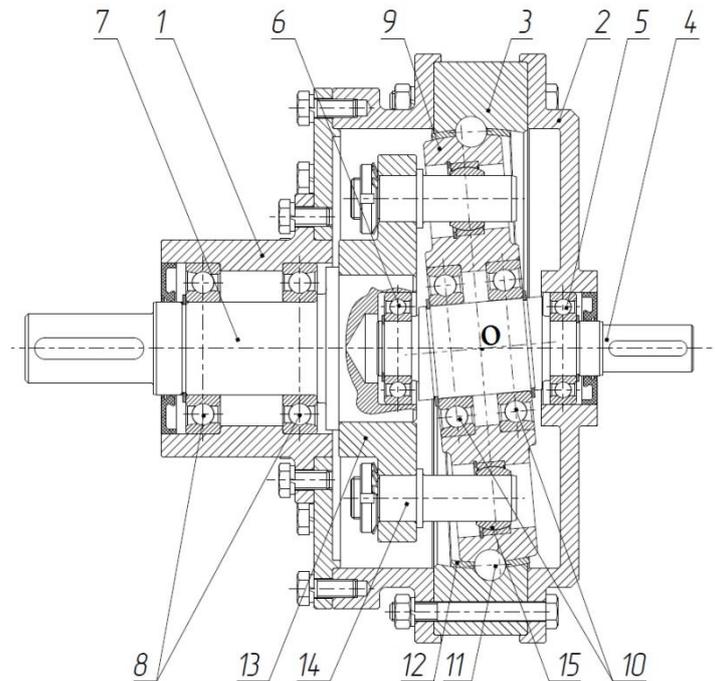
Construction of single-stage harmonic precession drive with rolling elements: 1 – assembled reduction gear casing, 2 – reduction gear cap, 3 – idler wheel, 4 – input shaft, 5 – radial bearing, 6 – radial bearing, 7 – output shaft, 8 – radial-thrust bearing, 9 – precessional wheel, 10 – radial-thrust bearing, 11 – ball, 12 – separator, 13 – circular plate, 14 – pin, 15 – spherical bearing, O – centre of precession
